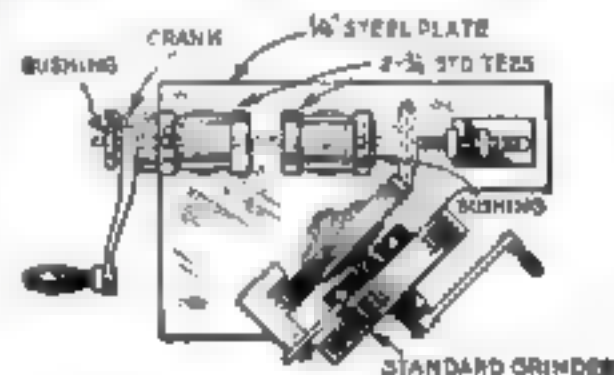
Top view of the valve-grinding machine that utilizes a small tool grinder
